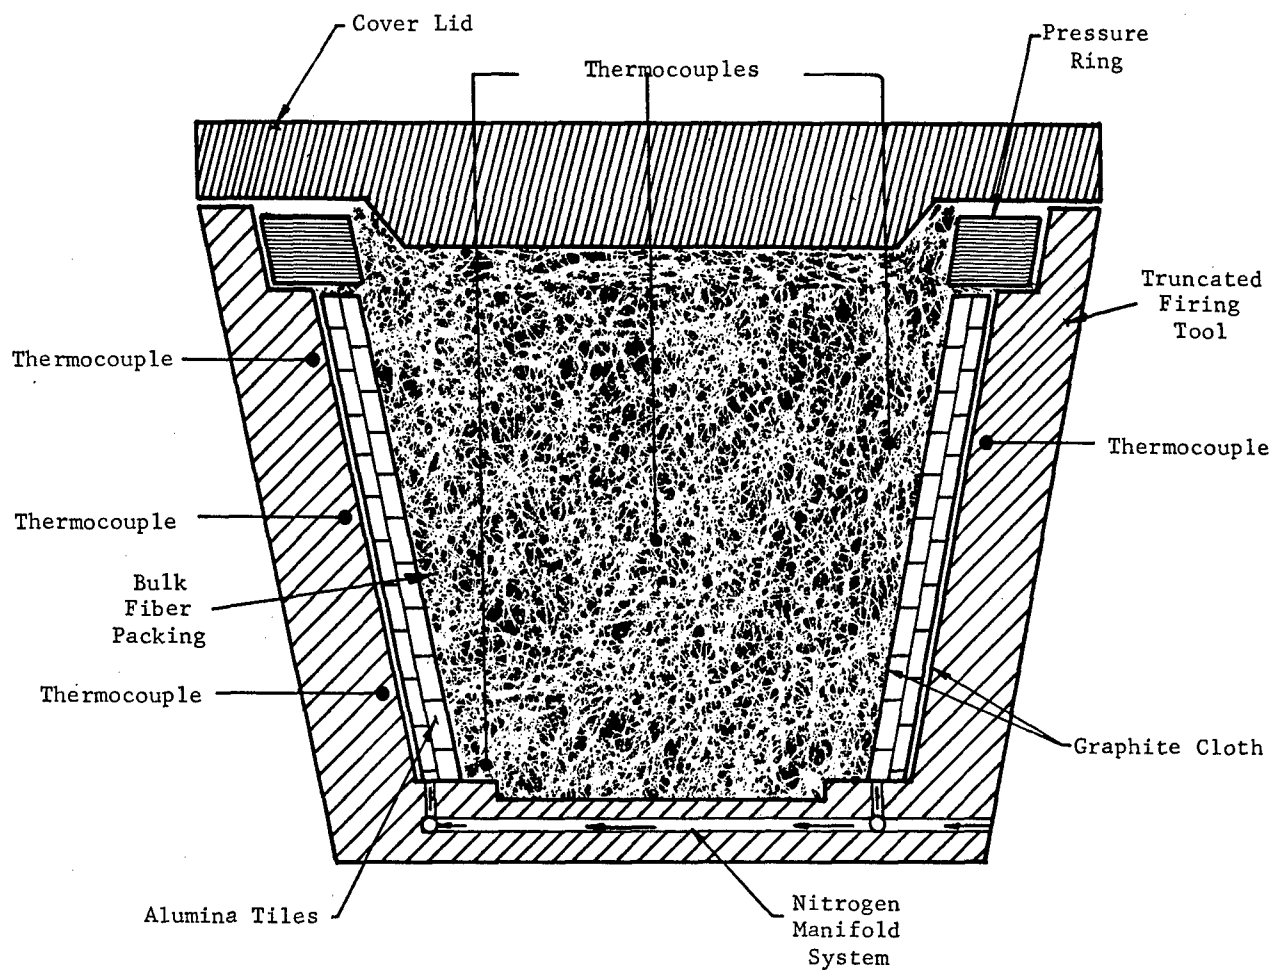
Cross Section of Modified Truncated Section and Firing Tooling Arrangement
